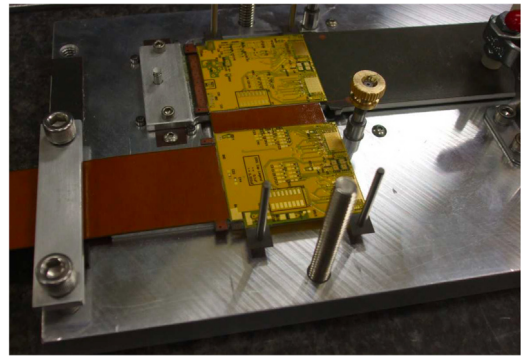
Fixture for the installation of the HFCB onto the backing structure.
